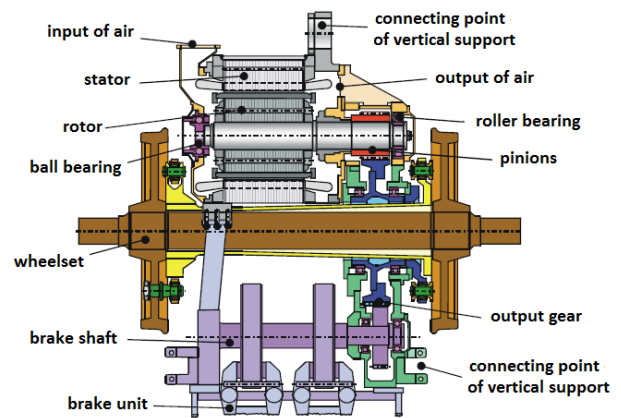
Full sprung wheelset drive HBA of the locomotive Taurus [Siemens].
